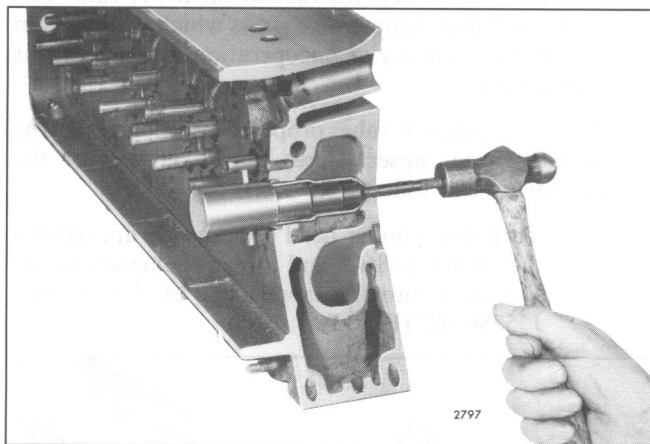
Removing Injector Tube with Tools J 5286-4C and J 5286-5
